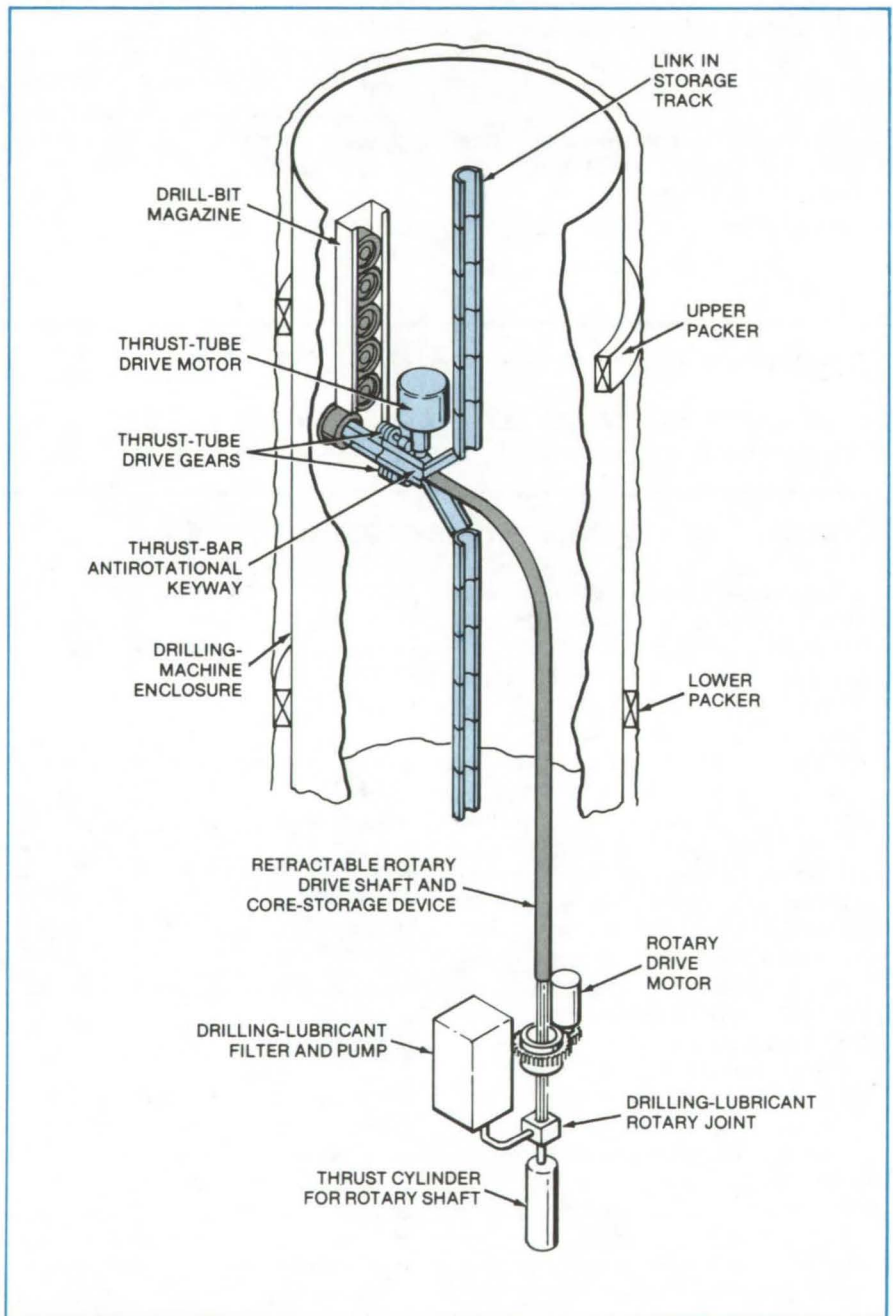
At the Start of Drilling, the thrust tube has been formed from the first links in the upper and lower chains of half-cylindrical shells. The thrust tube has engaged a drill bit and pressed it through a hole in the enclosure against the bore wall. The rotary shaft is inserted in the thrust tube and turns the drill bit.
